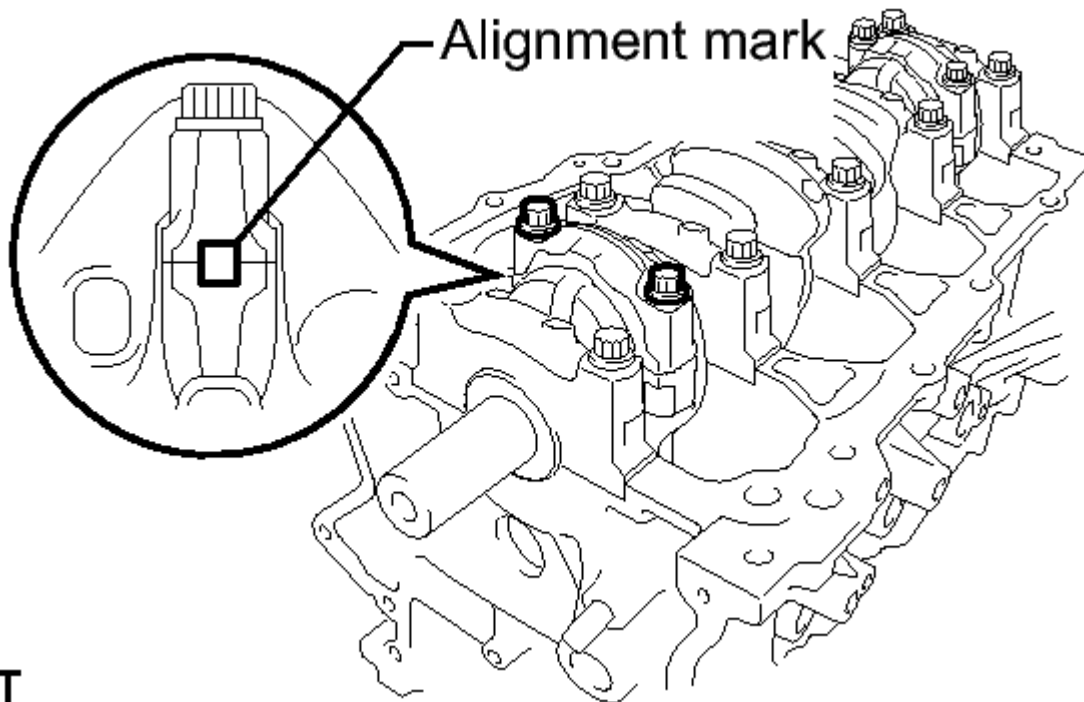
Identifying Alignment Mark On Connecting Rod And Cap
